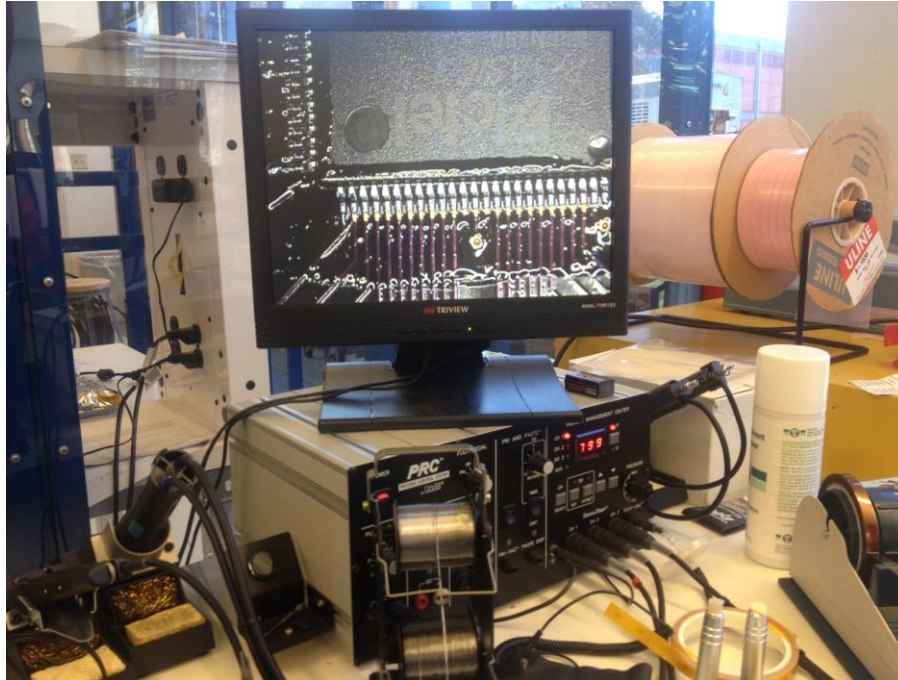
External camera view of ProASIC3 nano soldering to PCB board as seen through the microscope.
